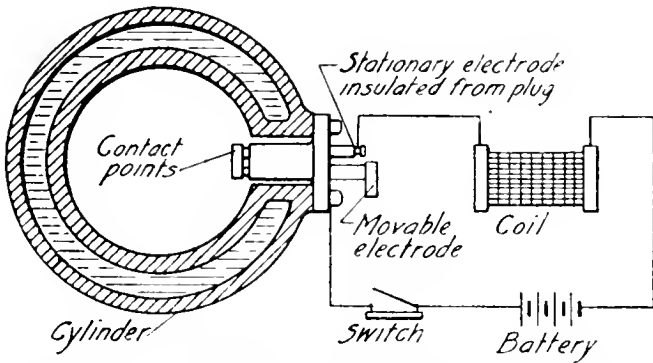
Wiring assembly as used on a make-and-break ignition system
